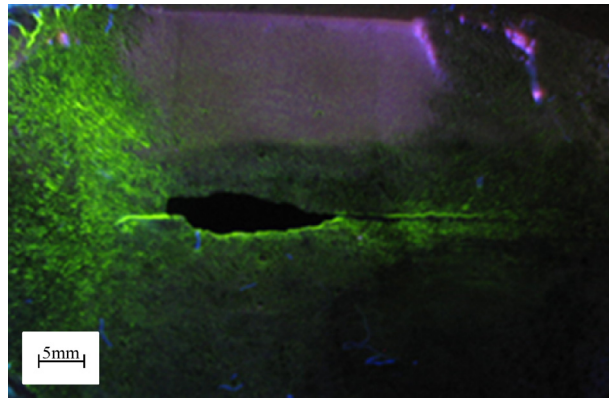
Fractured pipe area through UV light after magnetic particle testing (MT).
